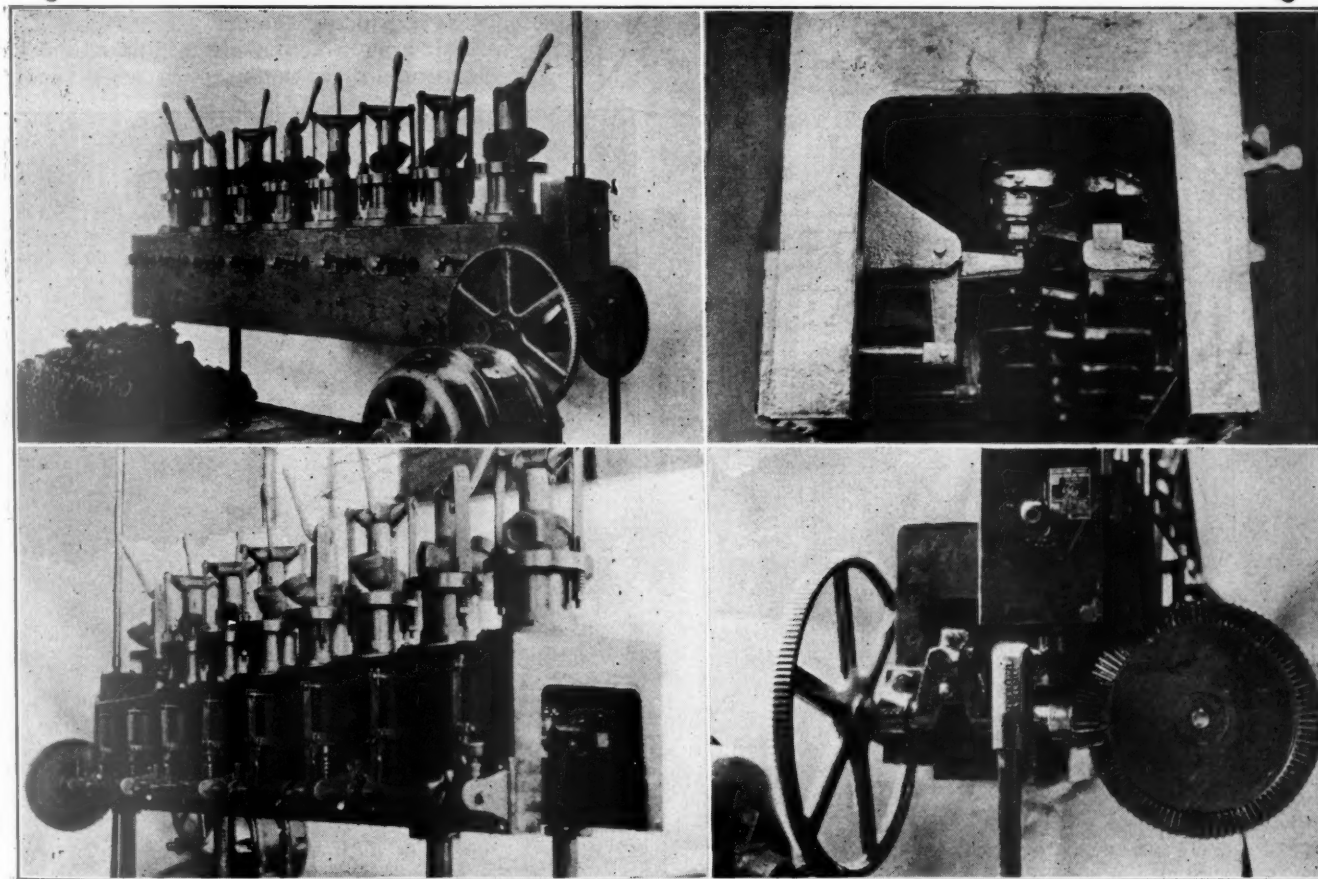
Left top and bottom—Front and rear views of an eight spindle angle cock grinding machine; Right top—Looking under the table of the machine; Right bottom—The driving gears
